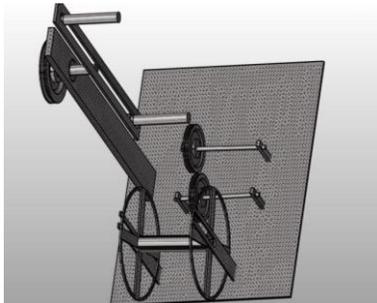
Mesh model of Coir Rope Rewinding machine complete assembly.
